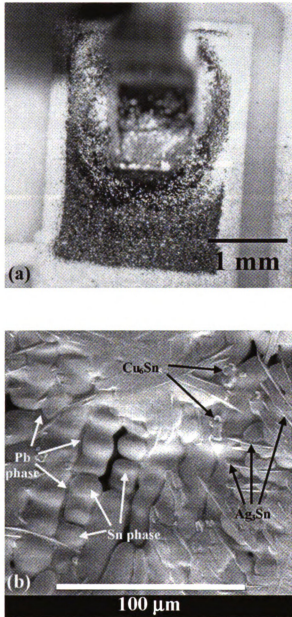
(a)Optical and (b)ESEM micrographs of surface appearance of as-soldered 95.5Sn/4Ag/0.5Cu solder joint.
